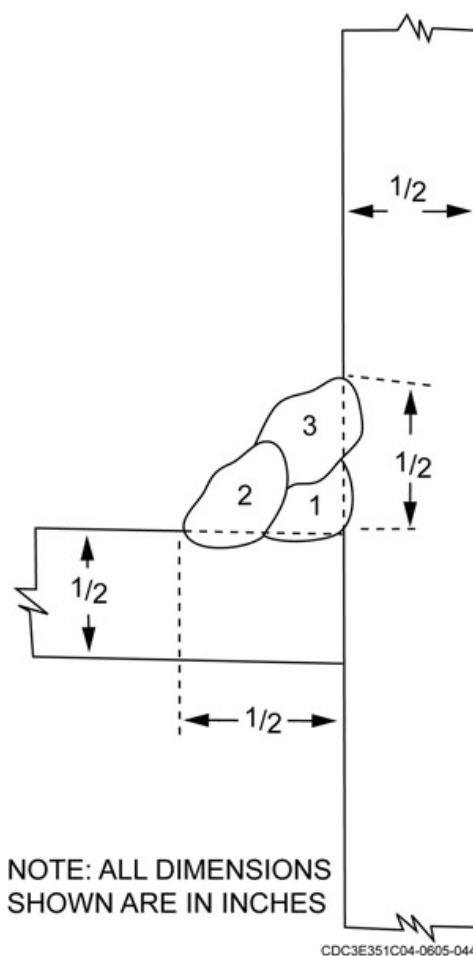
Fillet welds on thick plate. (horizontal position).
